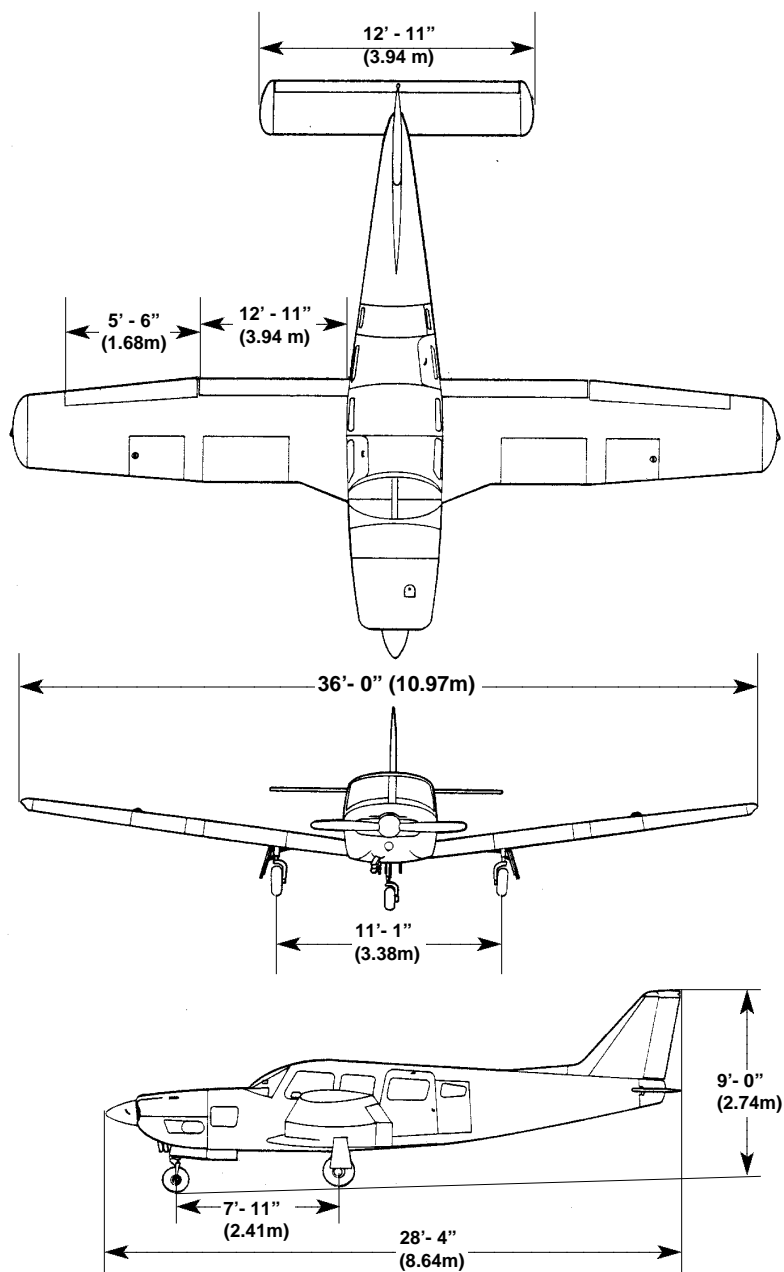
Three View of PA-32R-301 (Sheet 1 of 3)
